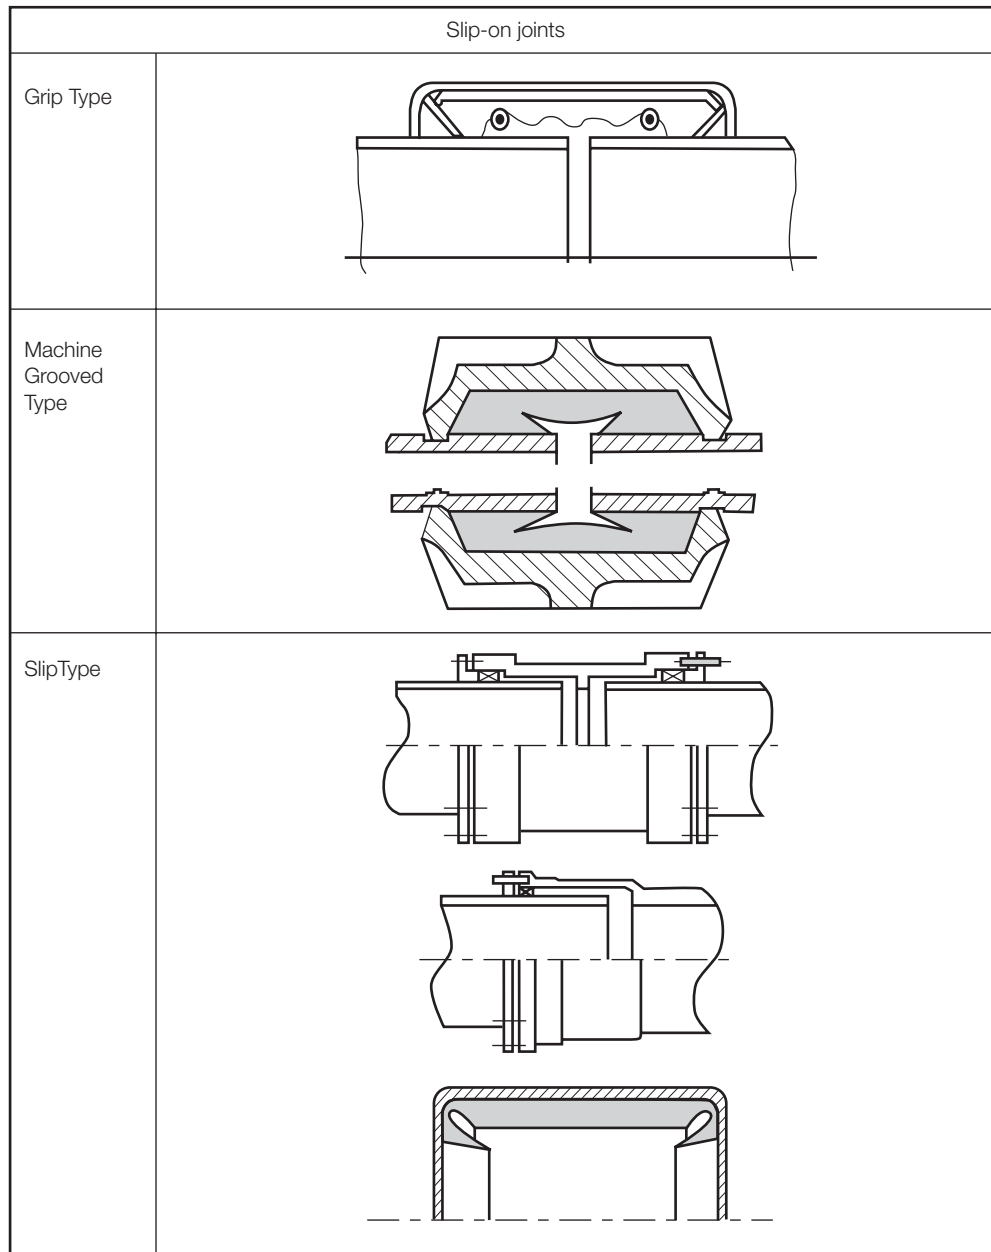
Examples of mechanical joints (conclusion)
